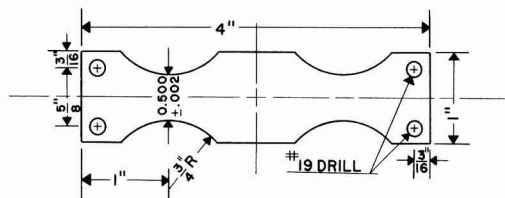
Dimensions of fatigue specimens. The thickness of the specimens ranged from 0.015 to 0.02 in. (375-500 μ m).
